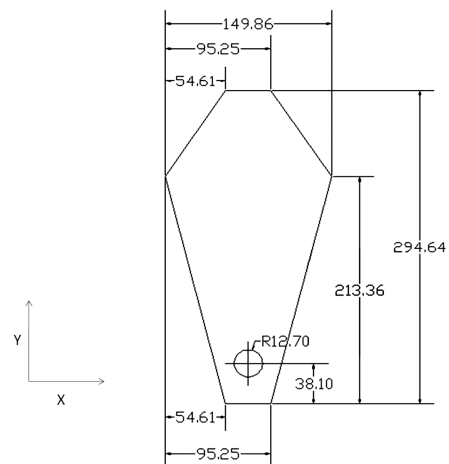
Biaxial fatigue specimen (modified geometry) [17].
